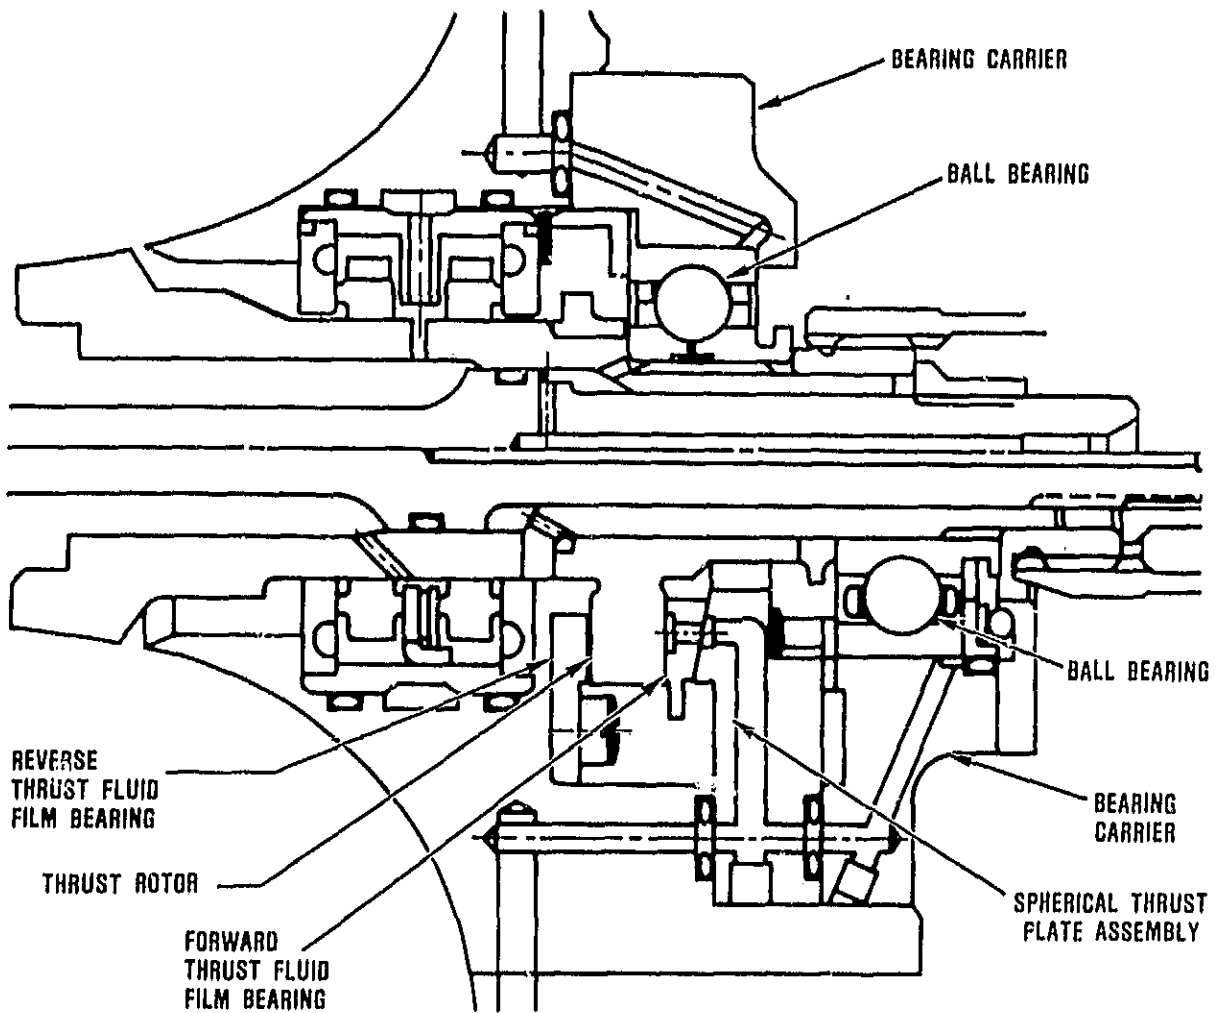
Hydrodynamic Fluid Film Thrust Bearing Installation.
